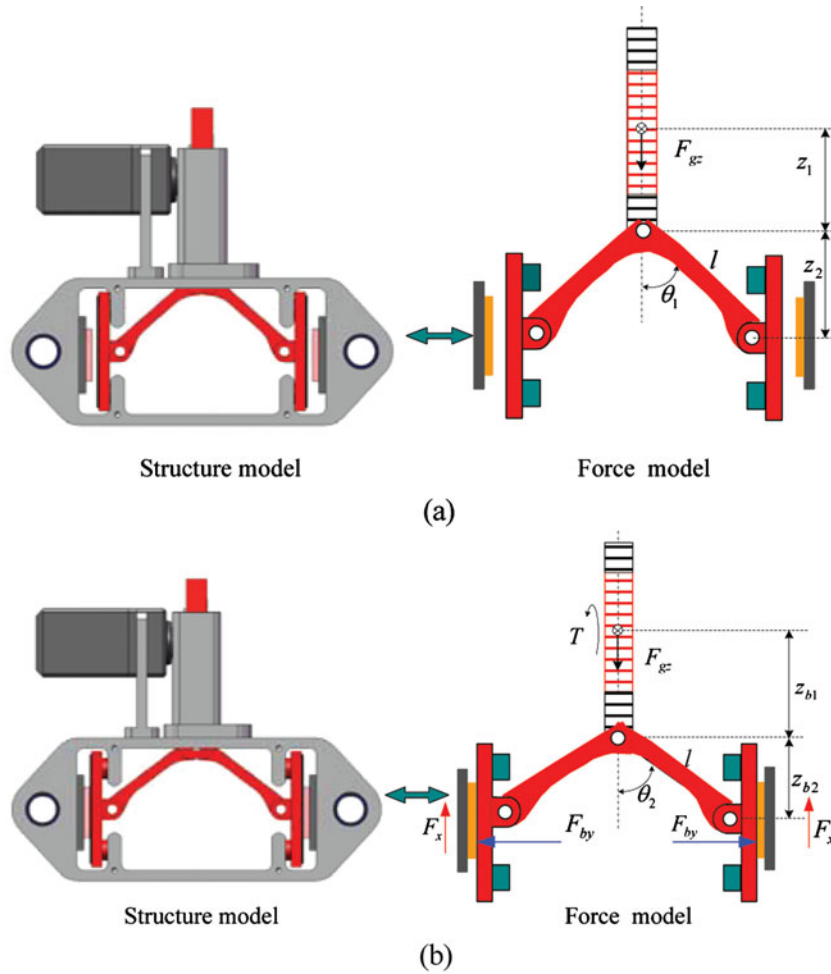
(a) Force analysis of the disengaged brake block. (b) Force analysis of the engaged brake block.
